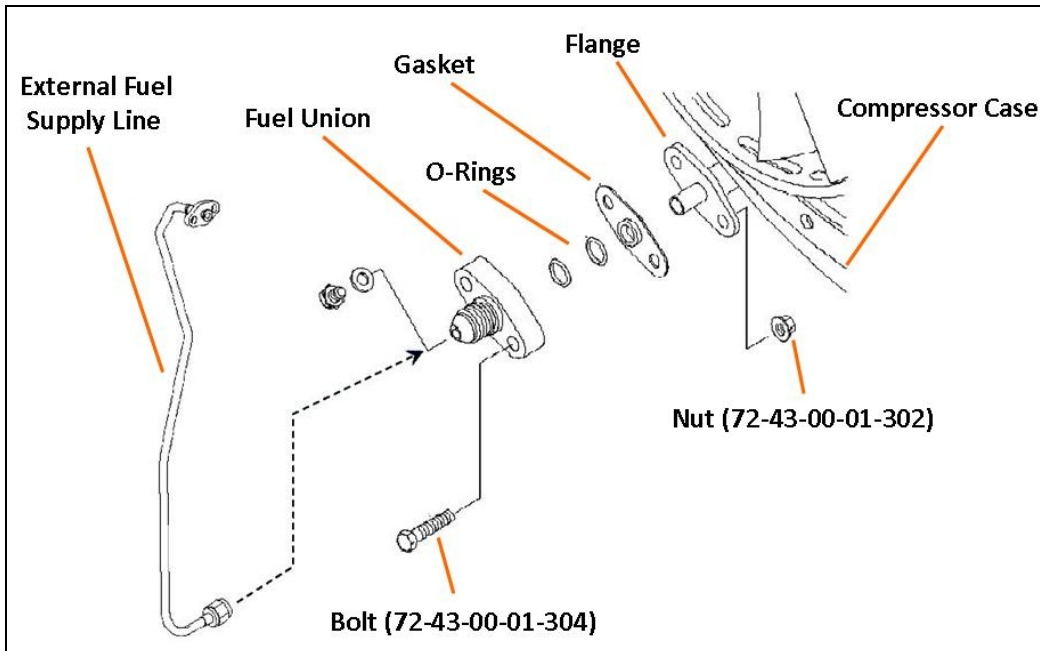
Exploded view of fuel supply routing on engine compressor case.
